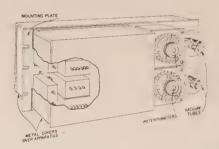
Typical Assembly of Panel Mounted Repeater Set
